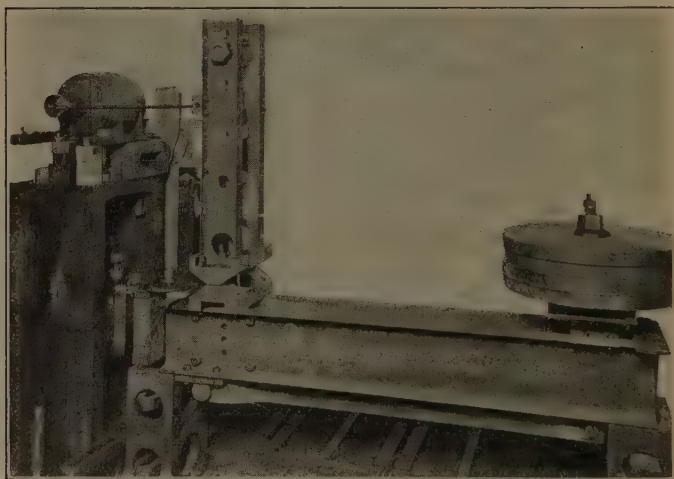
TURBINE-BUCKET VIBRATION MACHINE
